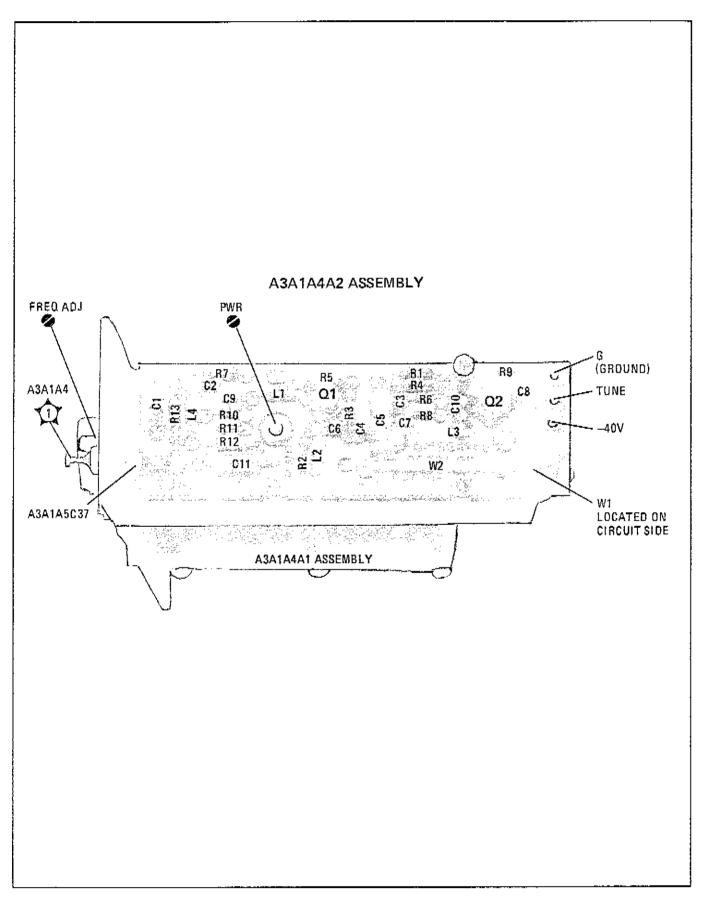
A3A1A4A2 M/N VCO Board Assembly Component, Adjustment, and Test Point Locations
